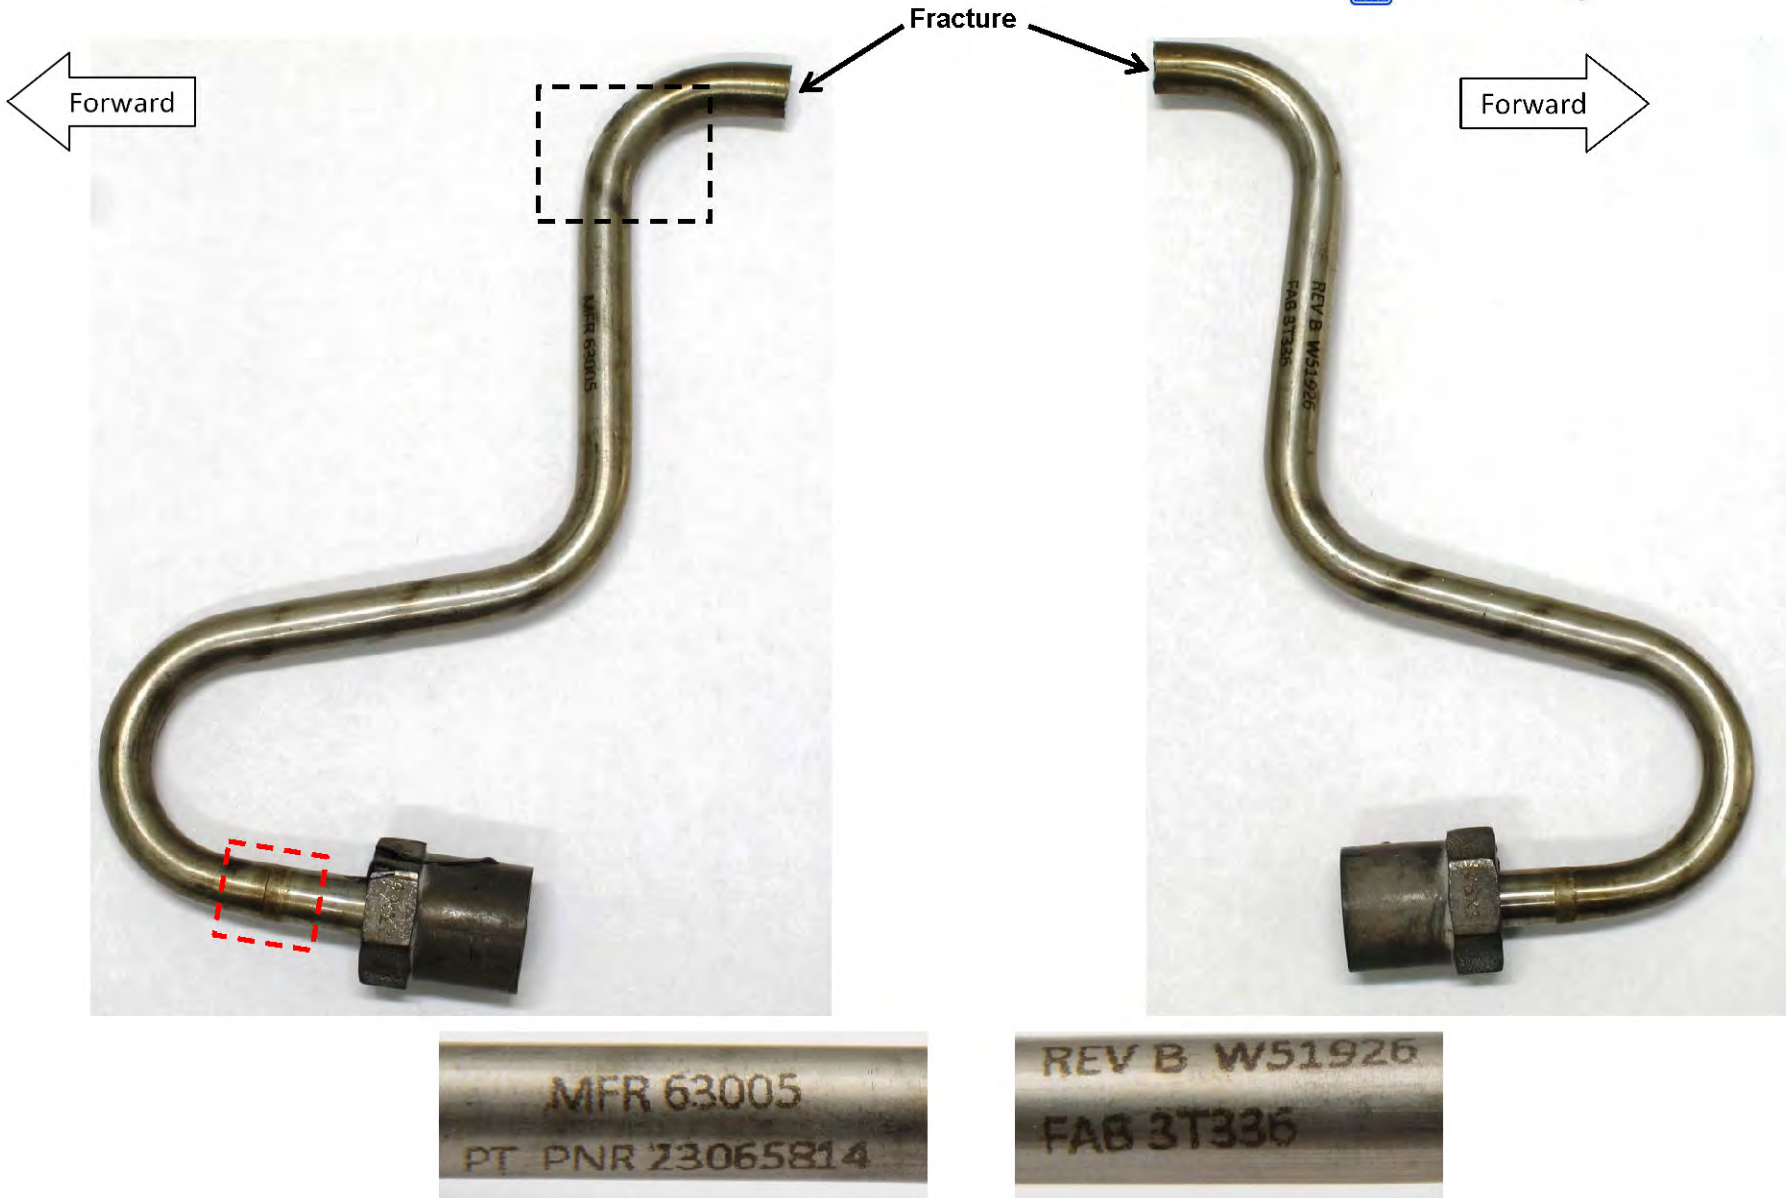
Overall views showing two sides of the fractured tube and detailed views showing the part markings on the tube (below). The black dashed boxed area is shown in Figure 5, and the red dashed boxed area is shown in Figure 9.
